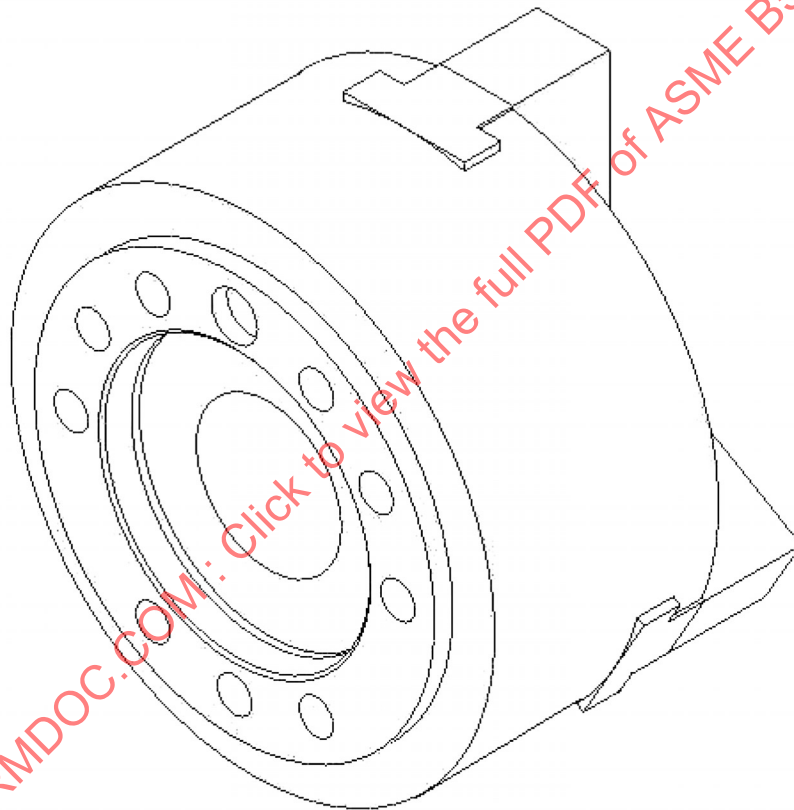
Type A Chuck and Faceplate Dimensions
